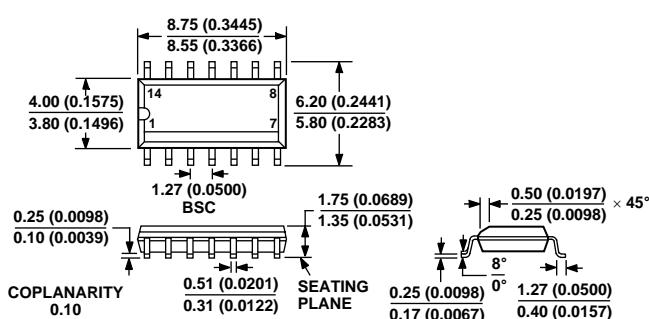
14-Lead Standard Small Outline Package [SOIC\_N]
